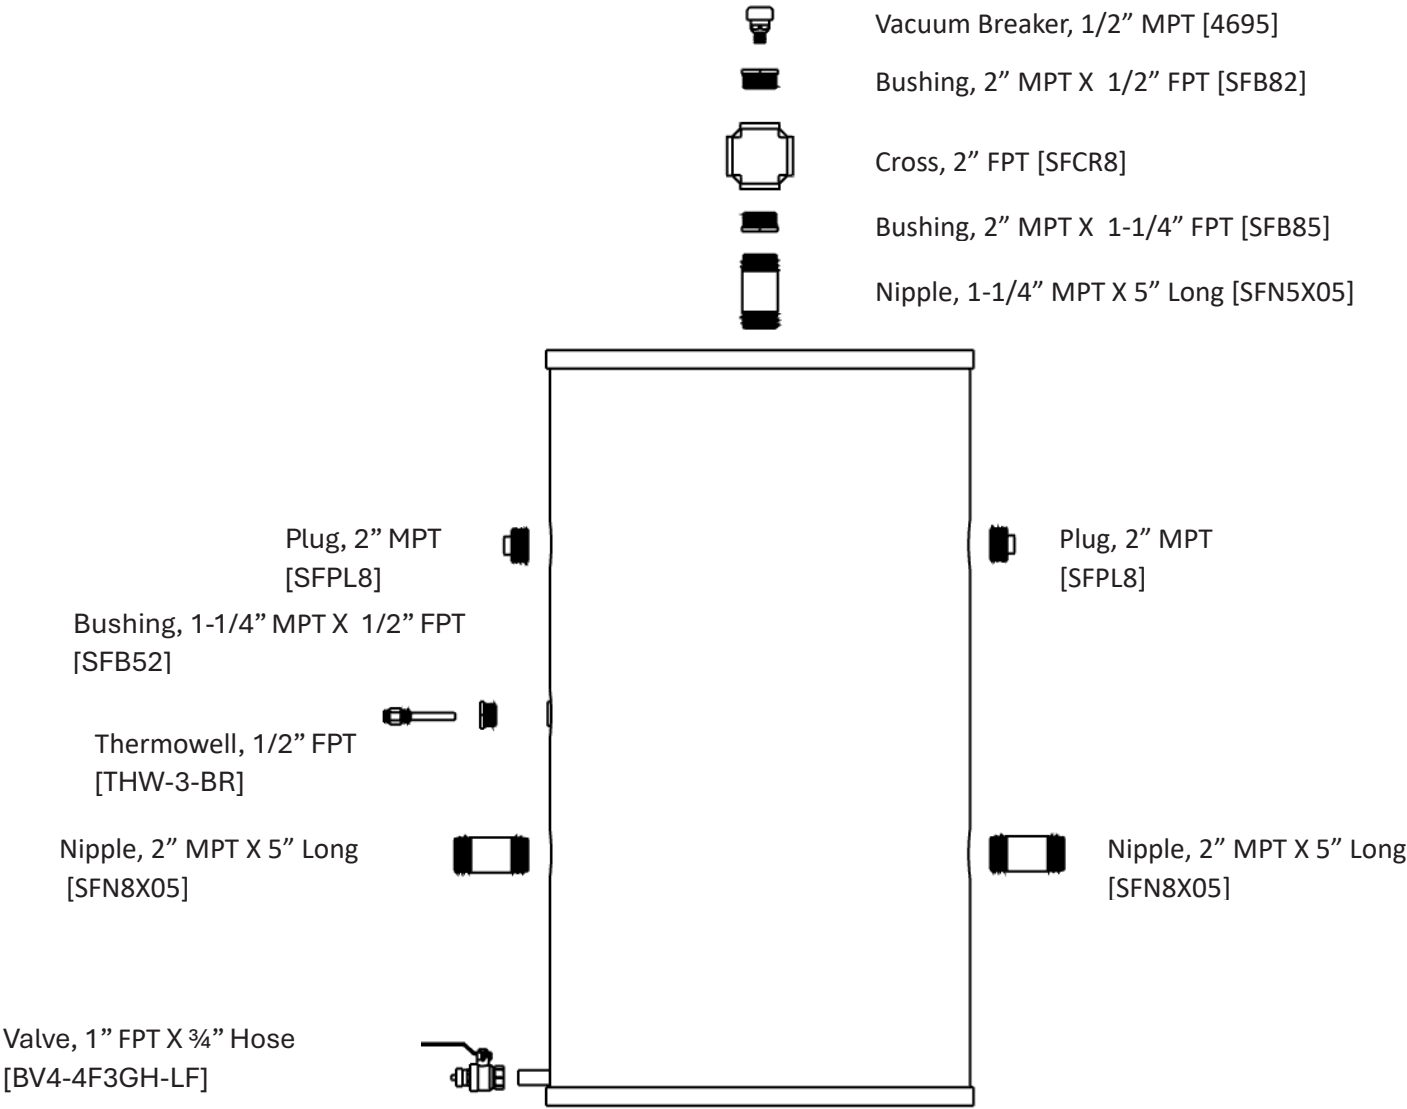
C. HCT-R_-DA Direct to Load with Air Vent (3-Pipe) Assembly Buffer tank components.Direct to Load (3-Pipe) with Air Vent Assembly DiagramHCT-R2-DA, HCT-R4-DA, & HCT-R5-DA
